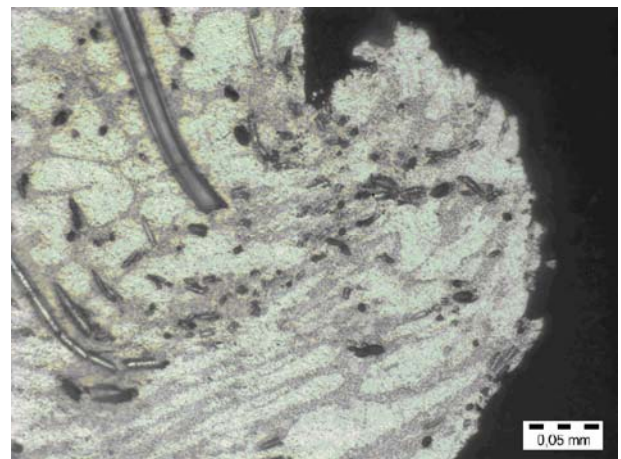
Chip base with visibly deformed ceramic fibres (cutting parameters: $v_c=650$ m/min, $f=0.24$ mm/rev)
